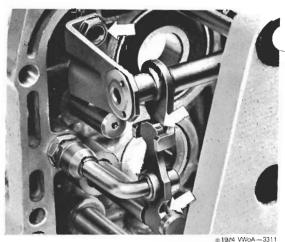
Left-hand bracket adjustment. After tightening bolts (top arrow), clearance should be equal at both ends (lower arrows) of reverse lever. If it is not, loosen union nut, rotate reverse lever support to obtain equal clearance, then torque union nut to 3.0 mkg (22 ft. lb.).
